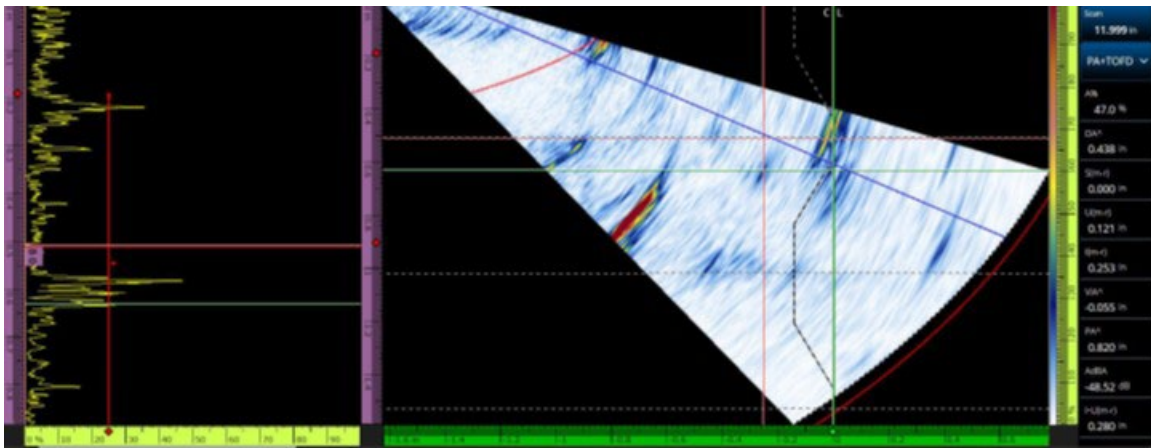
PAUT indication of defect at Location B in fillet weld test panel MGL-3 from Repad-raster scan
